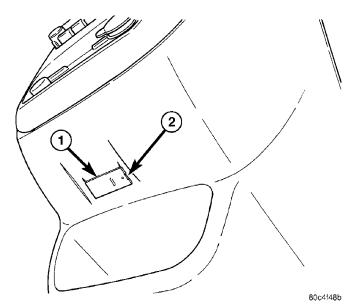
LOWER INSTRUMENT PANEL CENTER STACK
